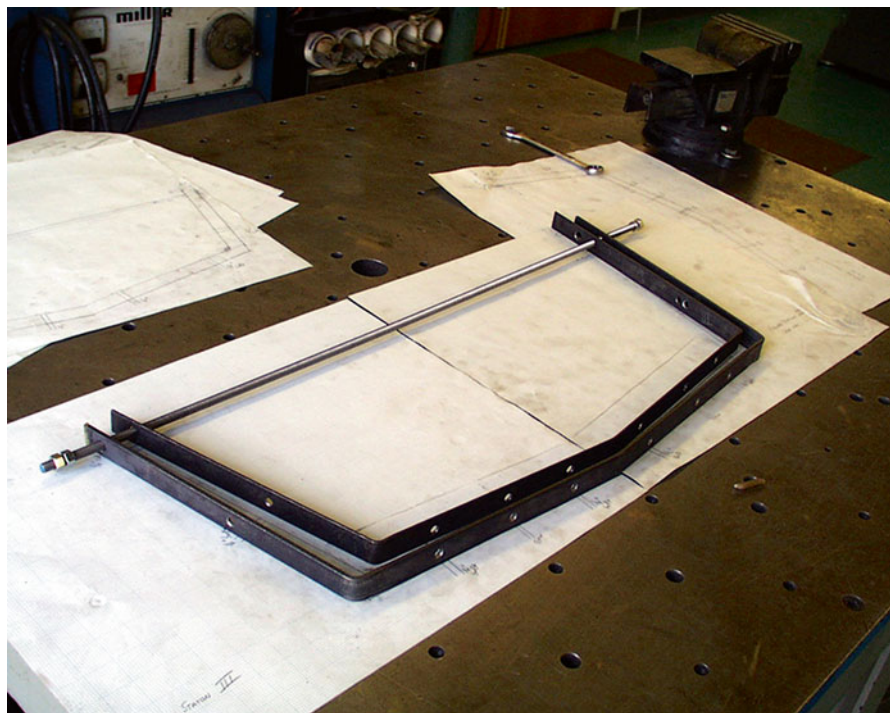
The paired steel brackets to be positioned under Frame III are shown on the paper template. The brackets have been bent to shape, drilled with fastener holes, and include a threaded steel rod in place at their upper ends to more firmly hold the side planks in place. It was later determined that the thwartship rods were not needed for stability and they were omitted
